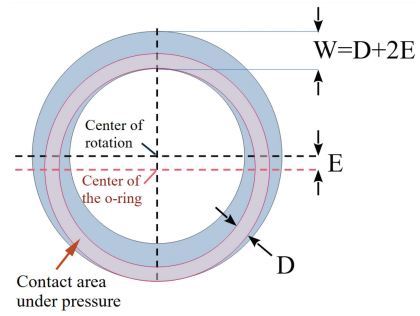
Eccentric O-ring as a self-lubricating rotating face seal. Spread application zone (blue) is formed by the eccentricity of the O-ring (red). Width W is a function of the O-ring's contact area under pressure and the offset E .
